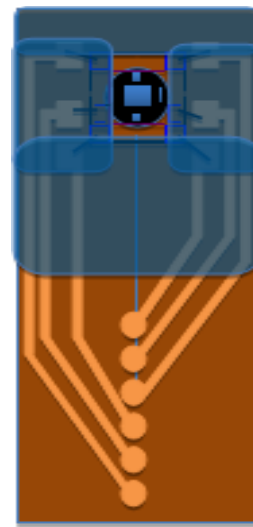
PCB Layout with Sensor and Epoxied for Protection
